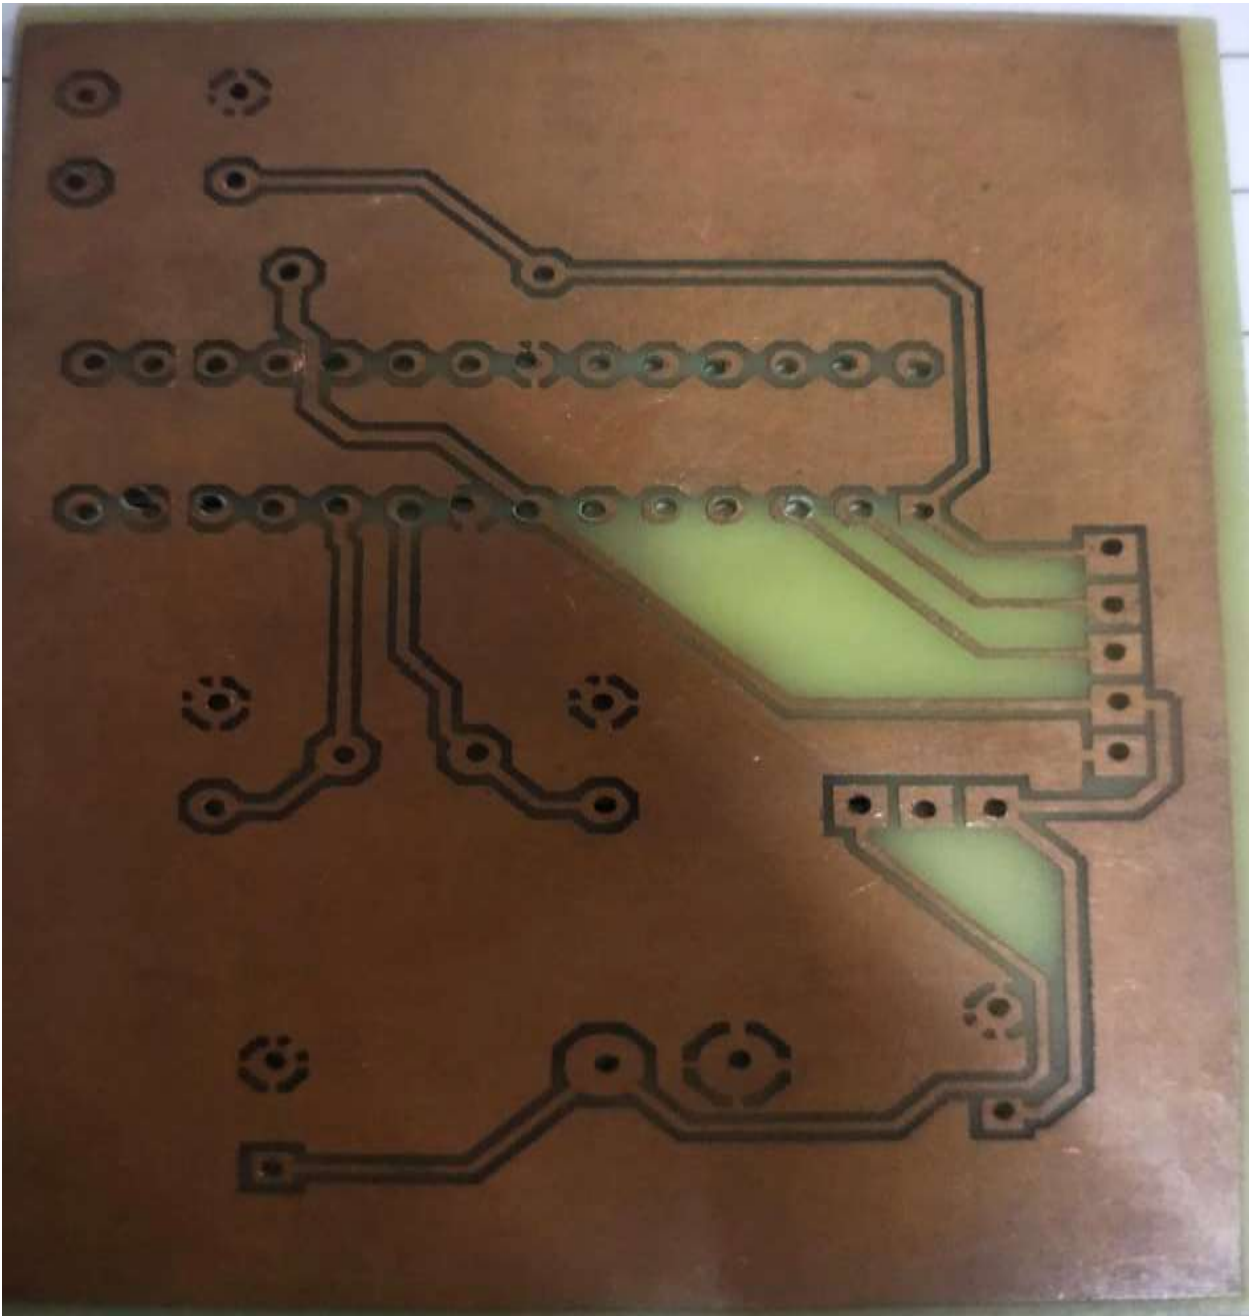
PCB Of Motor controller Iteration 1 (Before mounting components)
